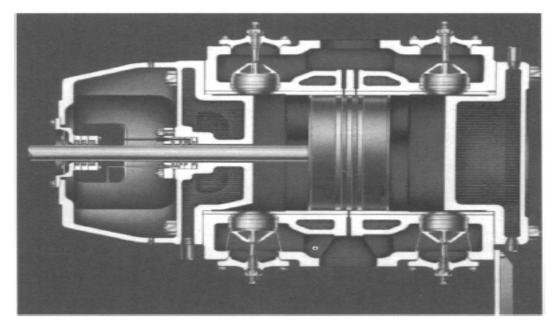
Cross-section view of the double acting cylinder and other parts
